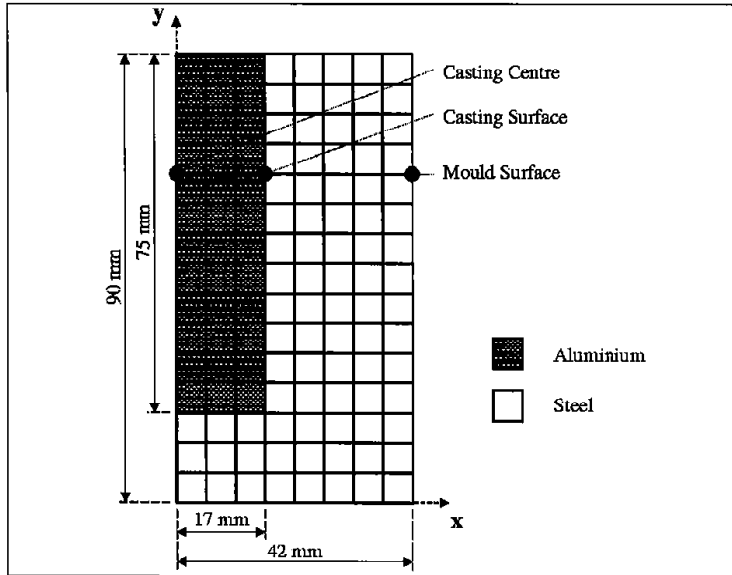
Cylindrical aluminium solidification test. Geometry.
